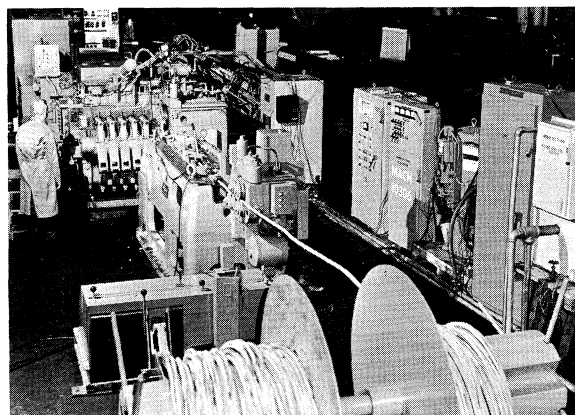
A cold/warm forming line that produces 5140H planet pinion blanks from coiled bar stock. *Courtesy National Machinery Co.
